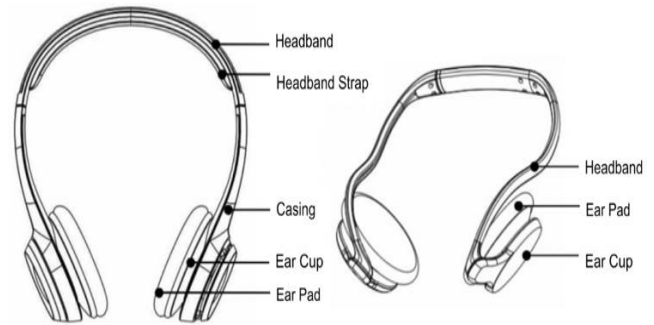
Detail design of headphone chassis (left- overhead style, right- behind-the-head style)
